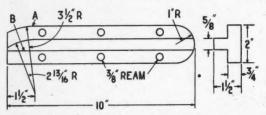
Drawing of Workpiece Requiring Three Radii to be Finished
